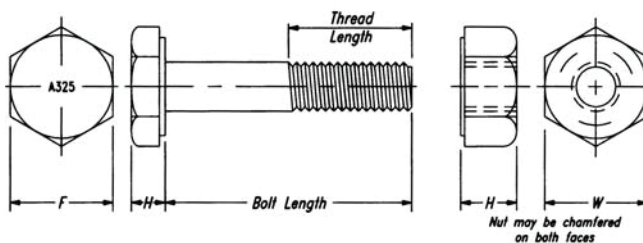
Heavy-hex structural bolt and heavy-hex nut.
